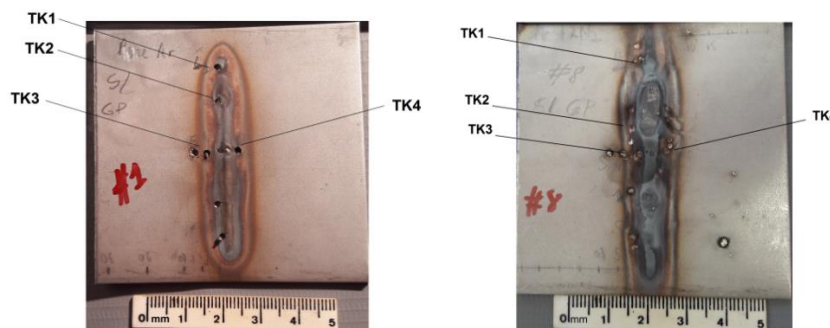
The welded plates with thermocouples location. In left hand, the weld plate #WA using pure Ar and the right hand the sample #WAN with Ar+2%N₂ as shielding gas.
